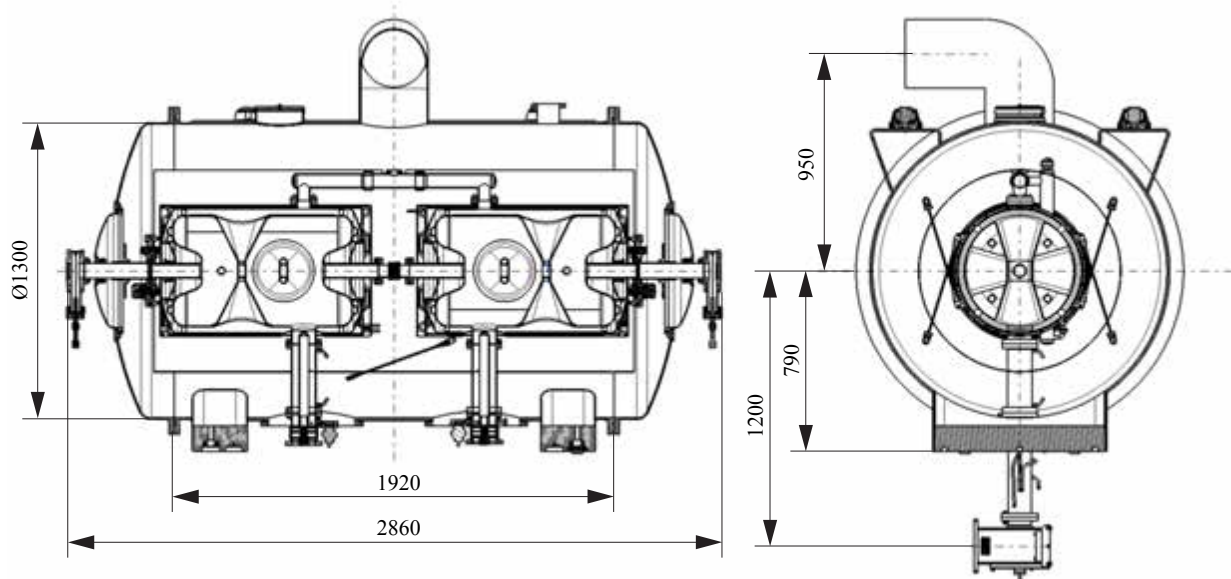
Spoke cryomodule cross sectional drawings and dimensions.
